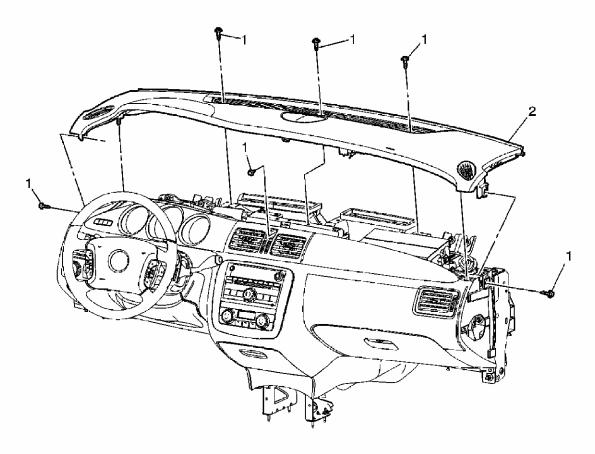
Removing/Installing Instrument Panel Upper Trim Pad Courtesy of GENERAL MOTORS CORP.
